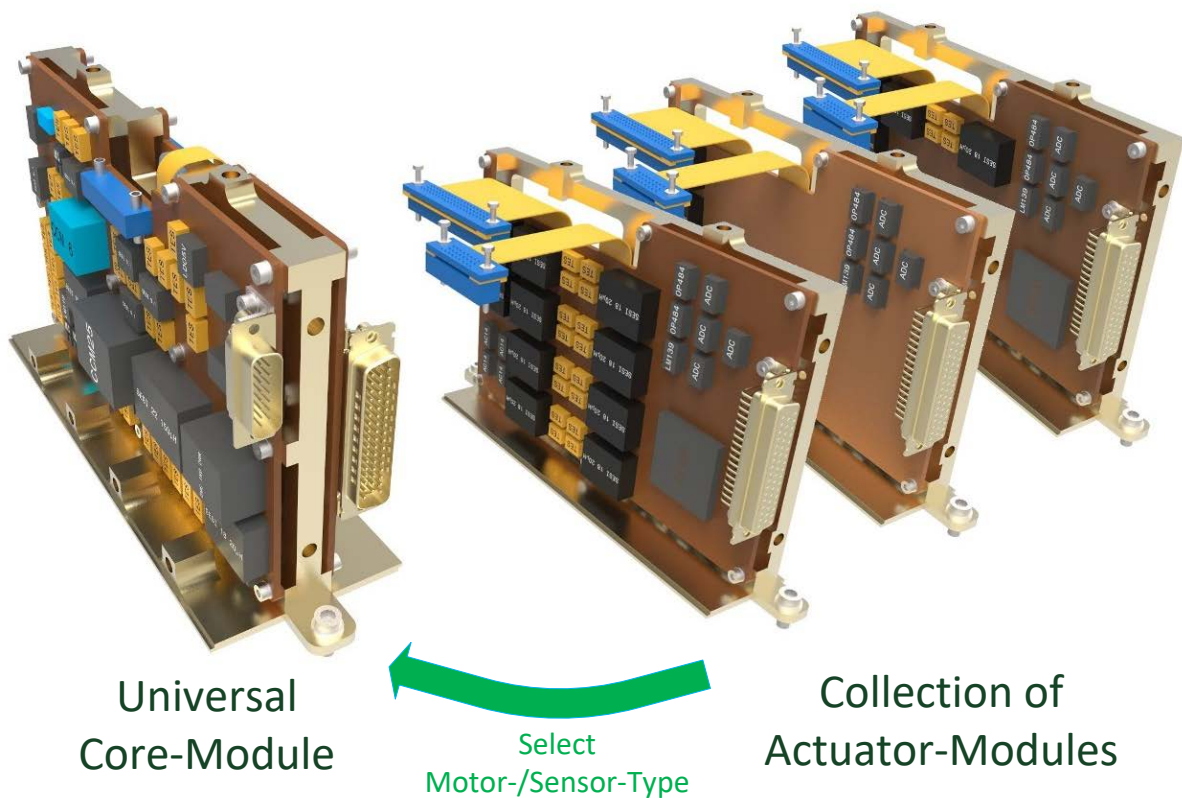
Different Actuator Frames can be connected to the universal Core Module
